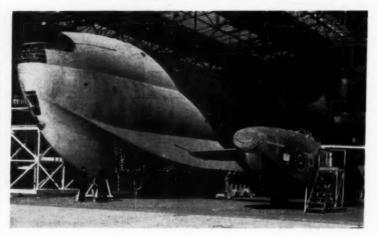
BOW VIEW OF PRINCESS HULL ON THE STOCKS
